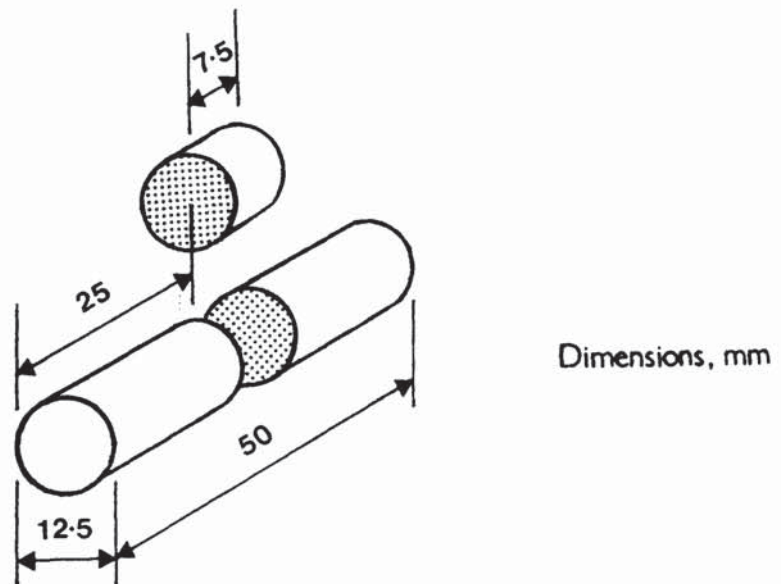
Residual stress specimen manufactured from 080H41 showing section removed for hardness tests.
